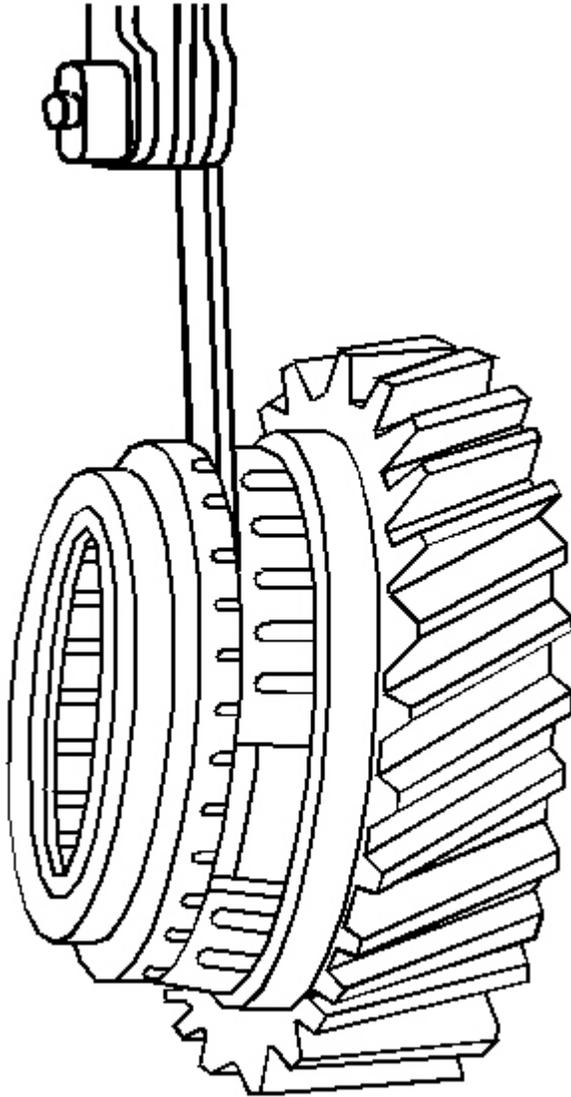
Measuring Gap Between Blocking Ring & Speed Gear
